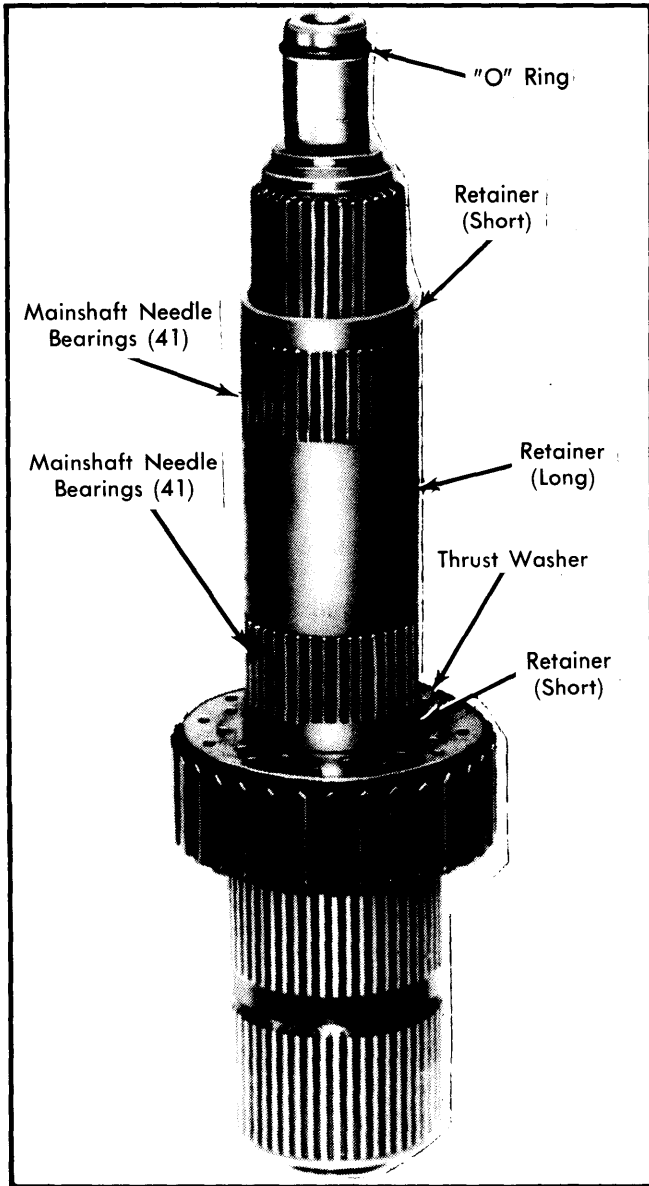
Installation of Mainshaft Needle Bearing and Spacers
